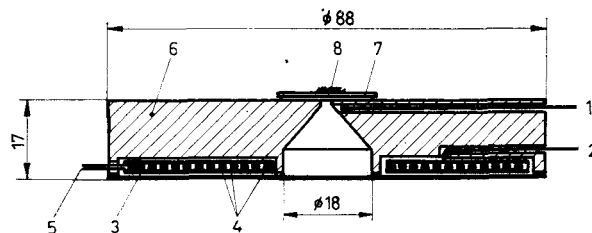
Arrangement of thermocouples in a microscope hot-stage. 1 — thermocouple "A"; 2 — thermocouple "B"; 3 — heating wire; 4 — mica; 5 — heater terminals; 6 — aluminium block; 7 — glass plate; 8 — sample
